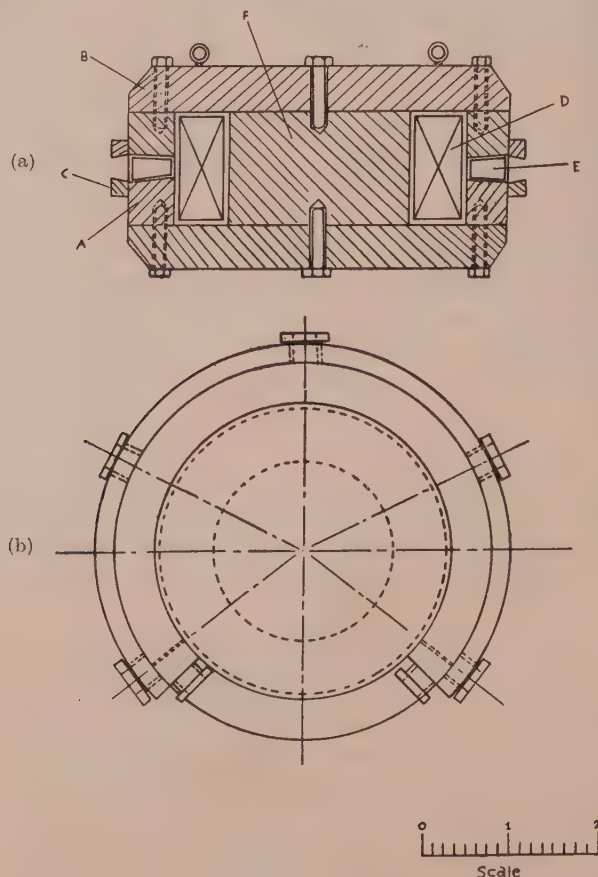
(a) Vertical section of the magnetic analyser with chamber: A and C—pole pieces with extension; B—yoke; D—coil; E—chamber.
